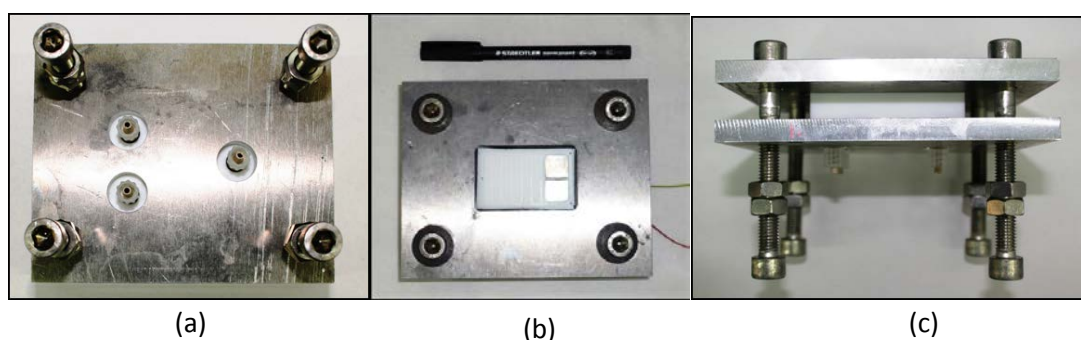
(a) Back view of assembly (b) Top view of assembly (c) Side view of assembly
